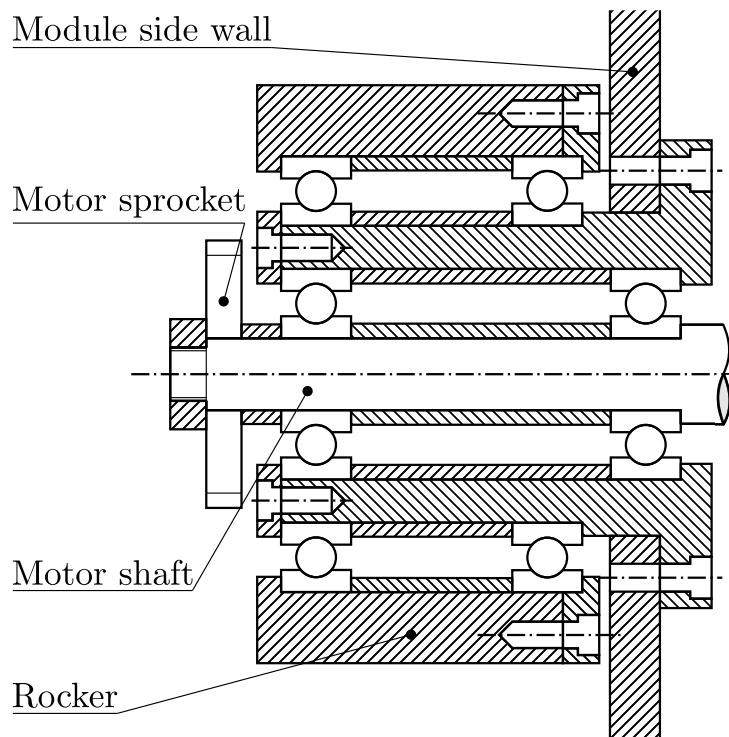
Detail of the  $C_{\sim}$  passive revolute joint
